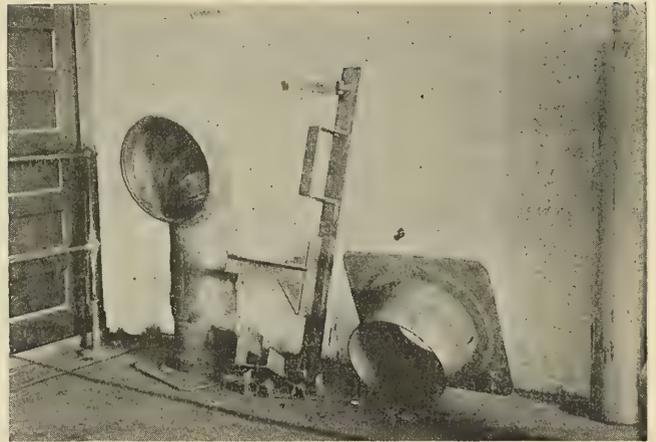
Left to Right: Portion of Welded Deck Rail Shown in Companion Picture; Welded Ventilator and Welded Ventilator Cowl, Ventilator Welded to Deck Plating; Welded Bulwark Splice; Combination Welds, Showing Welded-on Hinge, Pipe Hanger, Clip and Handle (Another Small Pipe Hanger Shown Below); Welded Deck Collar, Showing Welding at Deck Plate; Linde Oxygen Cylinder. All Welding by Oxy-Acetylene Process
